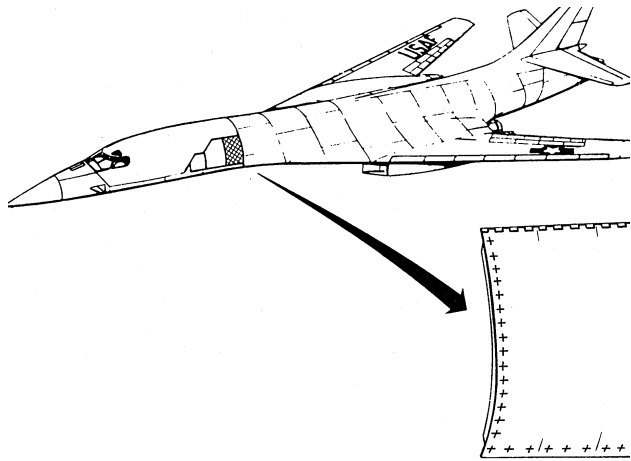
Access door attached to surrounding skin via multiple removable fasteners and piano hinge
